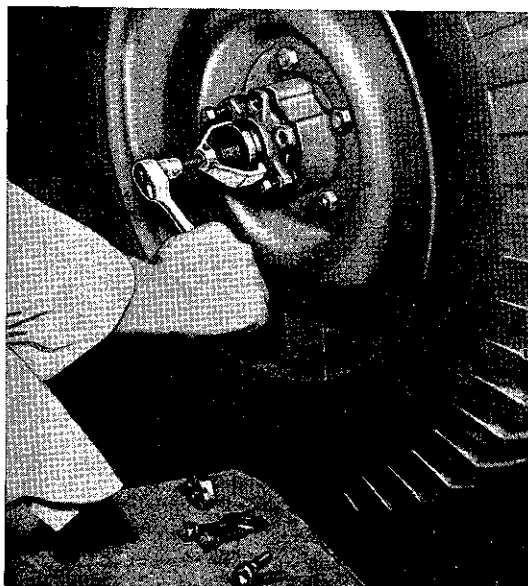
AXLE SHAFT DRIVE FLANGE PULLER
